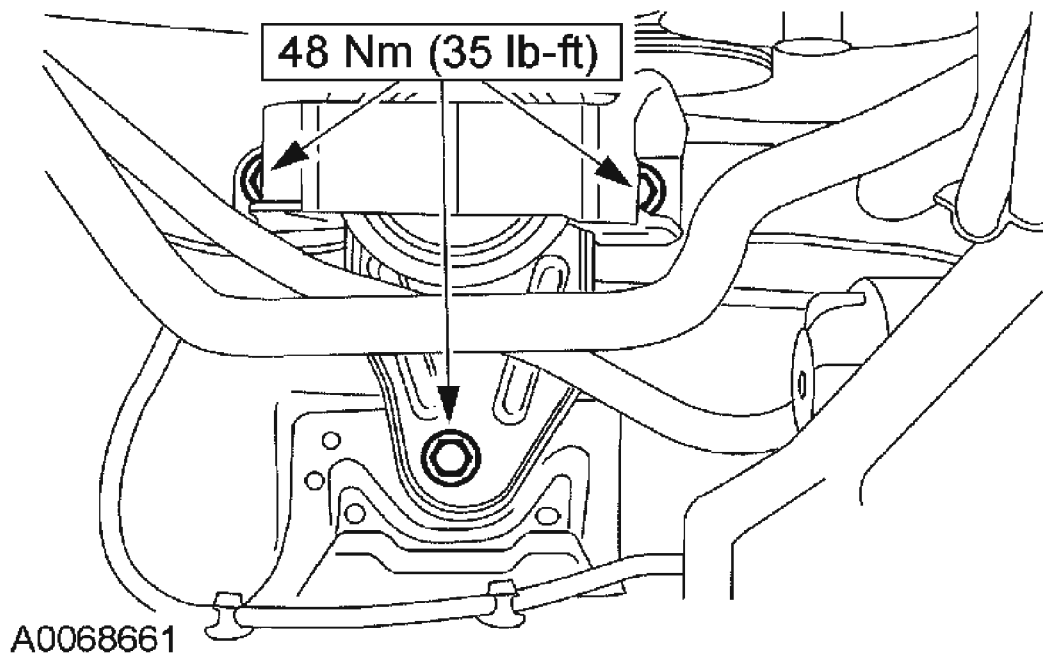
Removing Engine Mount Bolts And Engine Mount
